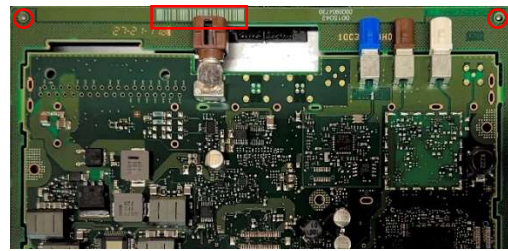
Example of a barcode and fiducial marks in a PCB.
